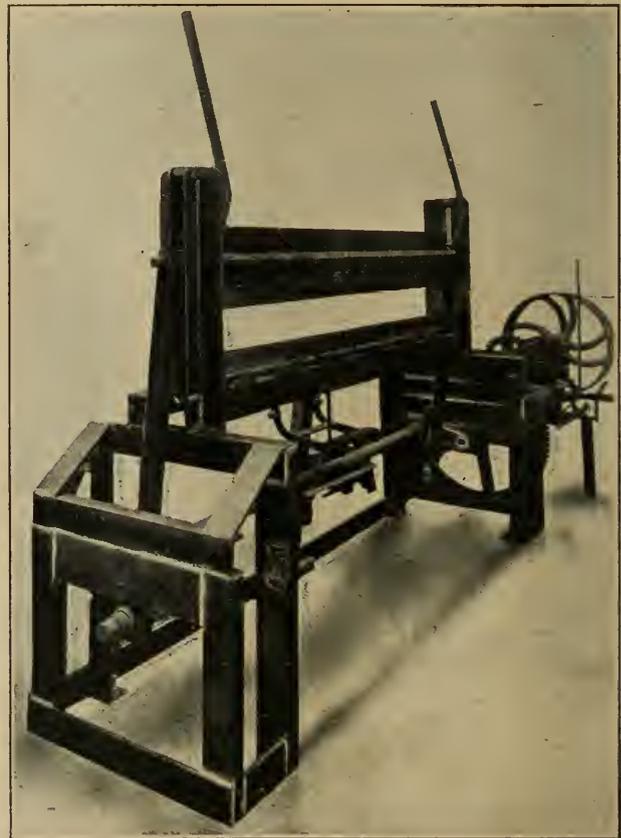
A CORRUGATOR BUILT UP OF STRIP AND ANGLE IRON BY ELECTRIC WELDING METHODS.
